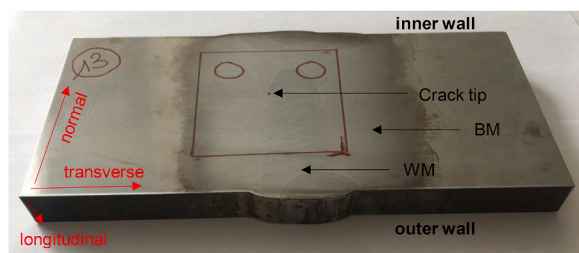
An example of a welded slice for the extraction of C(T) specimens.
